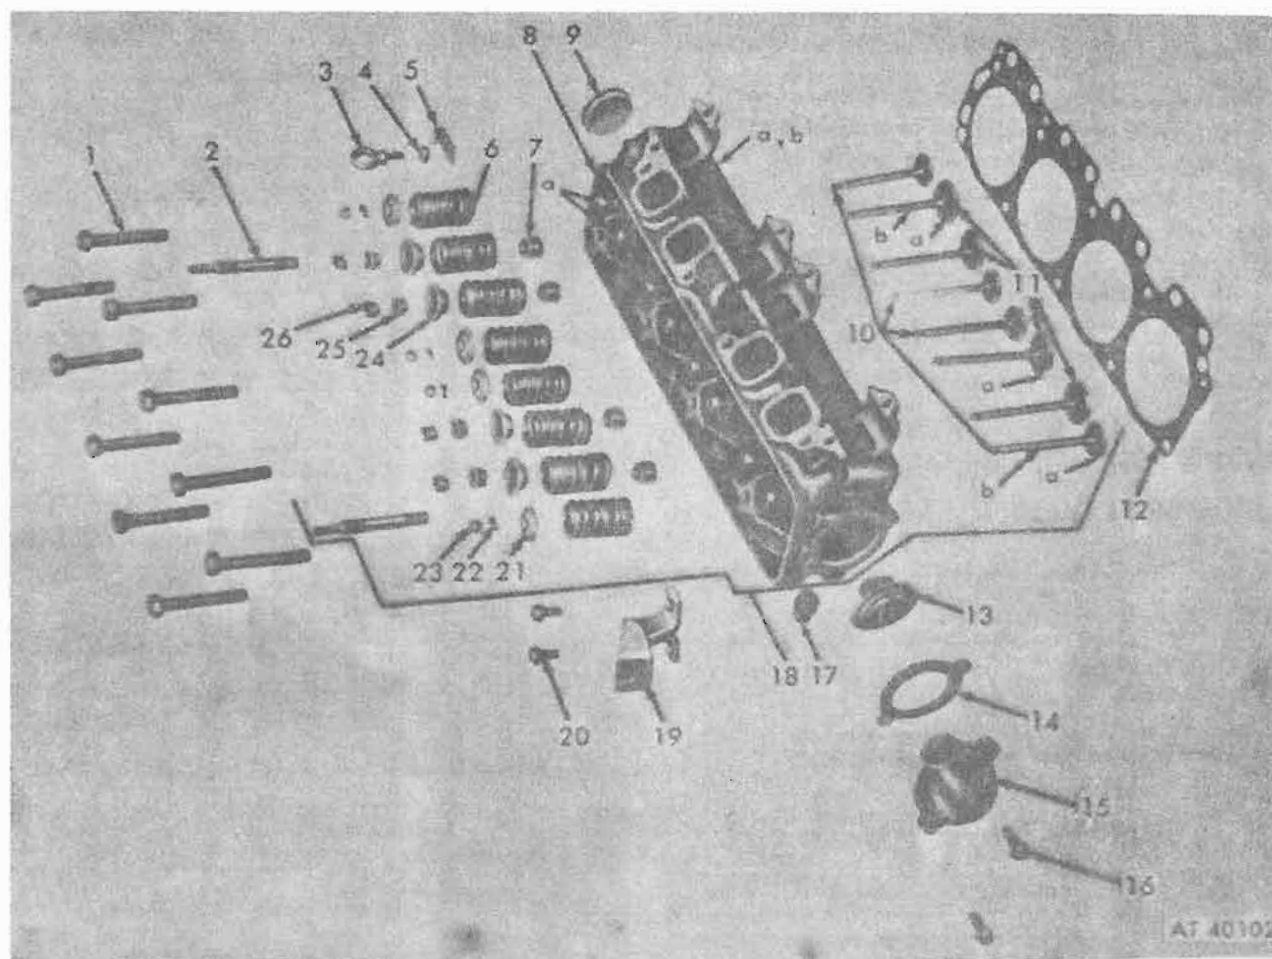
Cylinder head, valves and related parts—exploded view.
